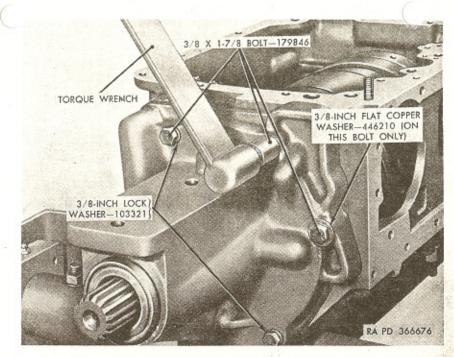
Tightening output shaft bearing retainer bolts (301MG).
